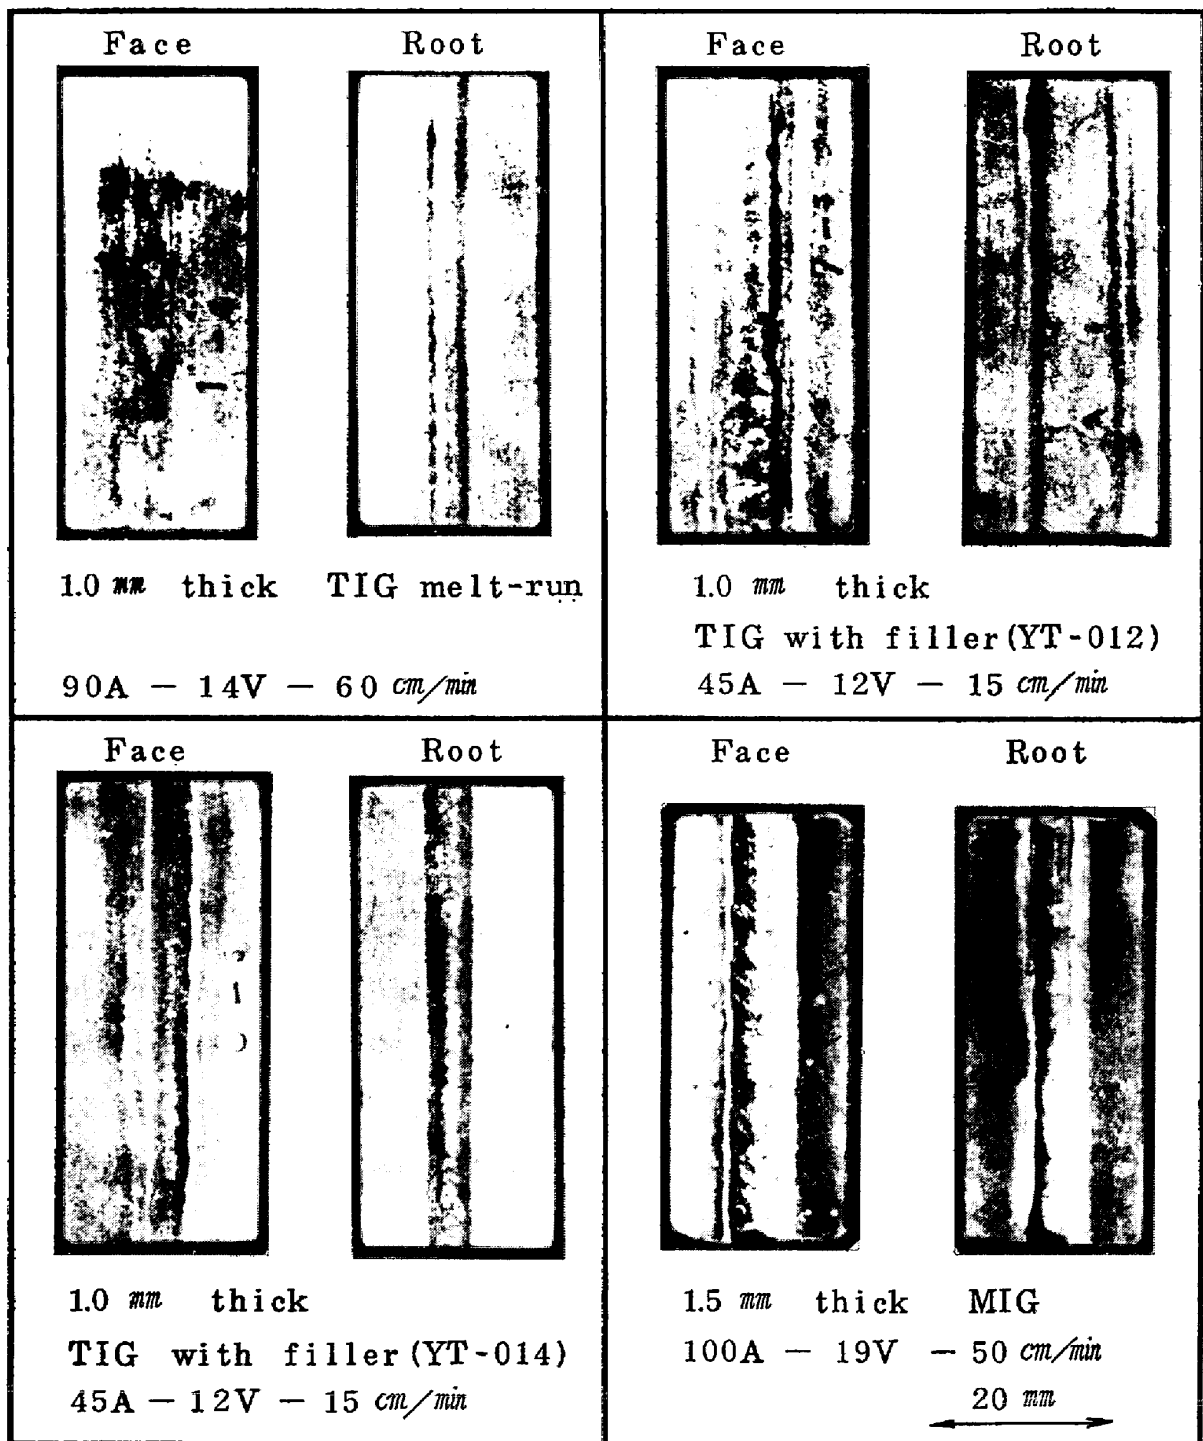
Outward appearance of TIG and MIG welds oxidized in exhaust gas at 1200°C.
